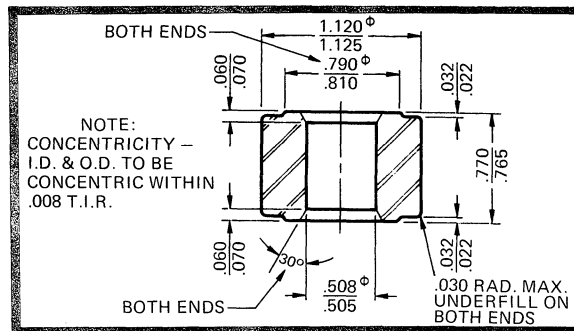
Typical tolerances of a cold-formed 5130-H planet pinion produced on a six-die cold former at a rate of 55 pieces per minute.
